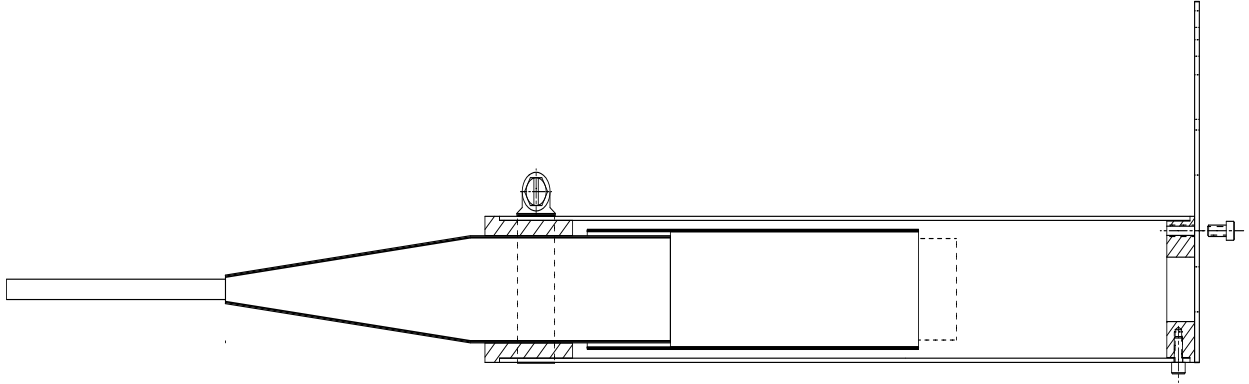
Side view of a front detector module. Scintillator (left, viewed edge-on), light guide (center), and photomultiplier tube (right) are all glued with optical cement. Patch panel for routing cables extends upward on the right.
